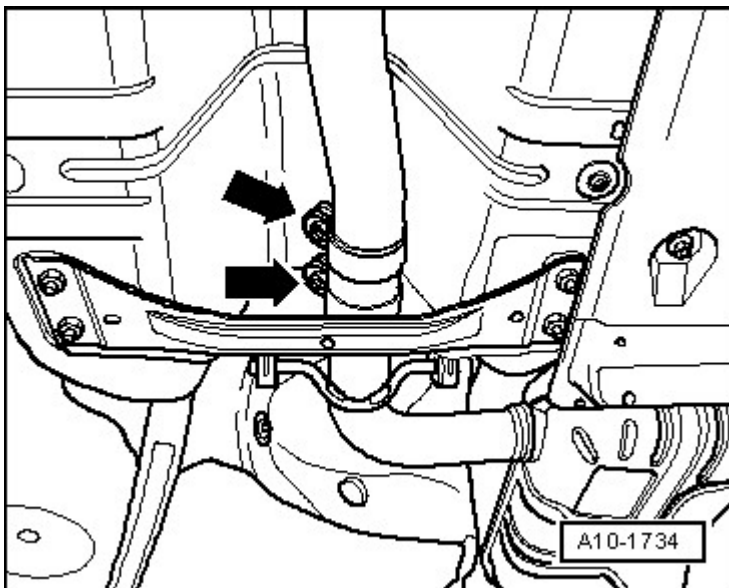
Disconnecting Exhaust System At Clamping Sleeve
